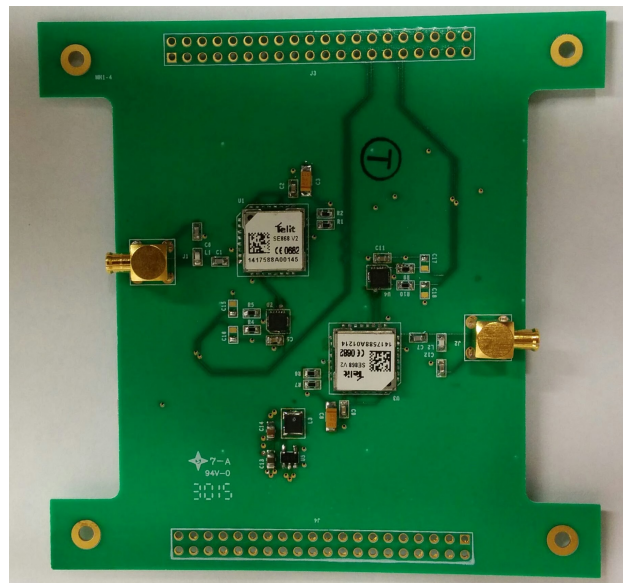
Custom PCB Design for GNSS-R on CubeSat
